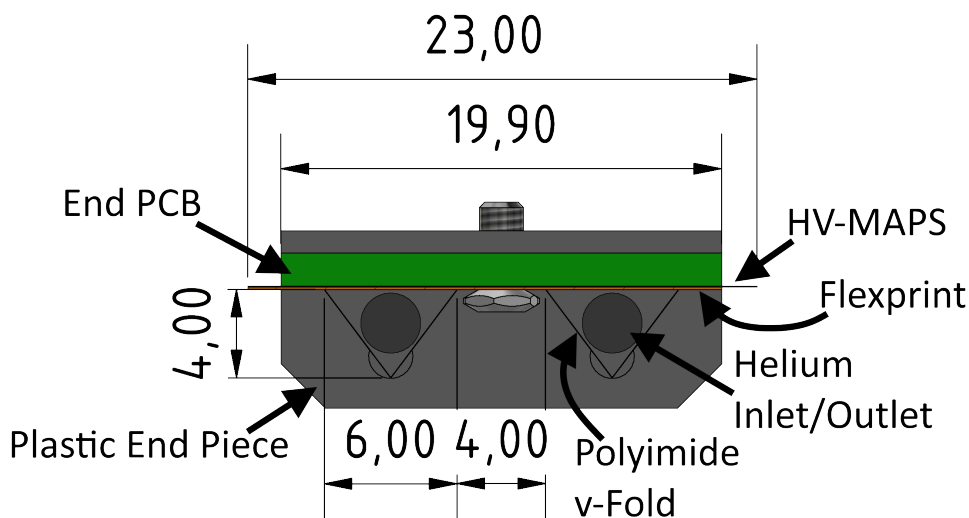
Cut view rendering of a strip submodule with labeled parts and important dimensions. All dimensions are in mm.
